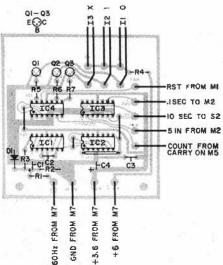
Mount the board components as shown here, once again taking care to observe all polarities.
